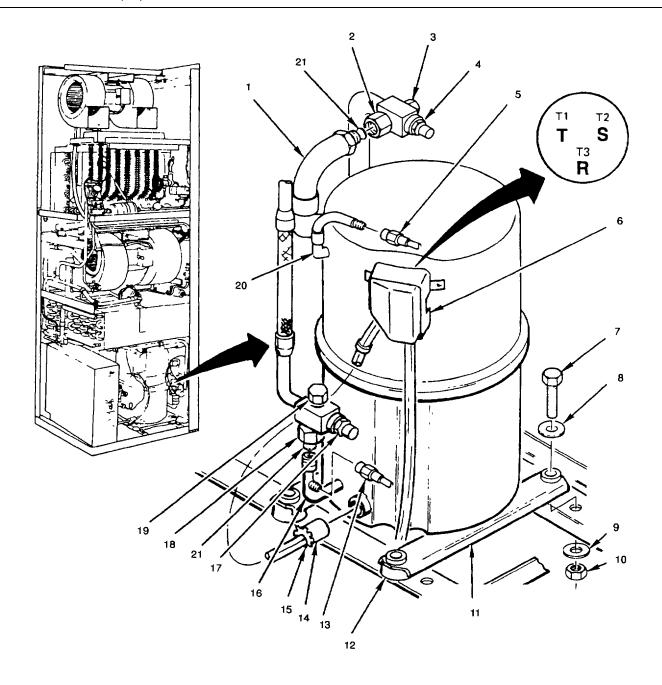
Compressor (B2) (Sheet 2 of 2)
